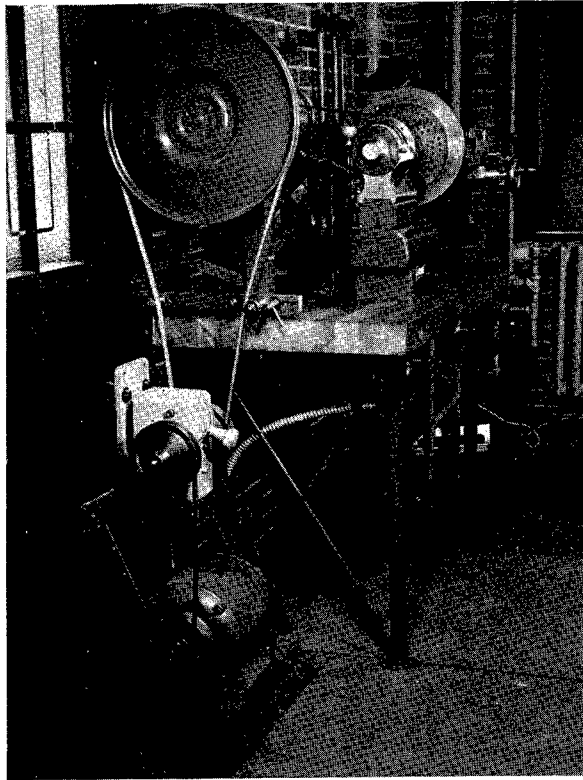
A. 1-to-1 aspheric contouring machine. Side view.
